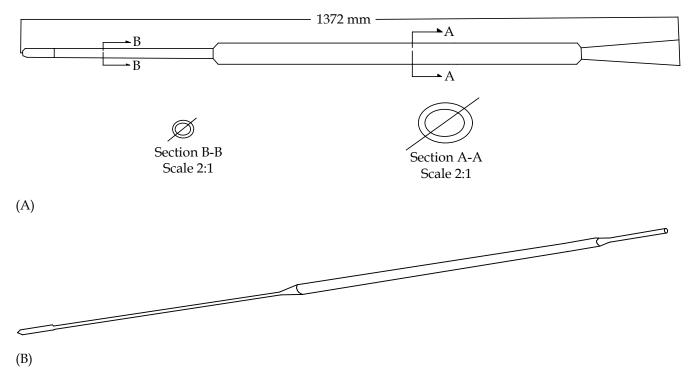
A: Engineering Drawing for the Redesigned Cane; B: Pro/Engineering Drawing.
